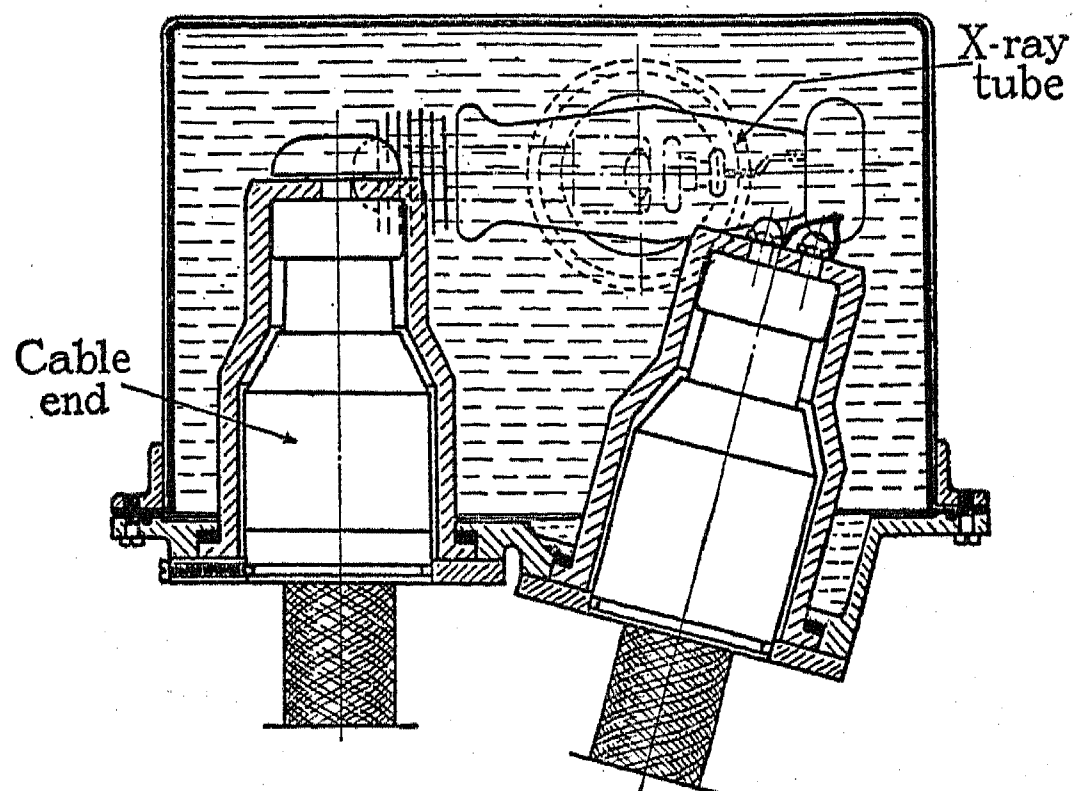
X-ray tube, oil-immersed in earthed vessel fitted with earth-sheathed cables.
